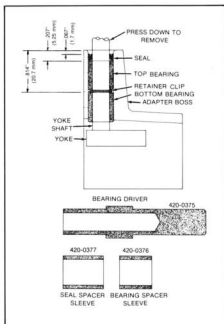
BEARING INSTALLATION AND TOOL PACKAGE (420-0374)
